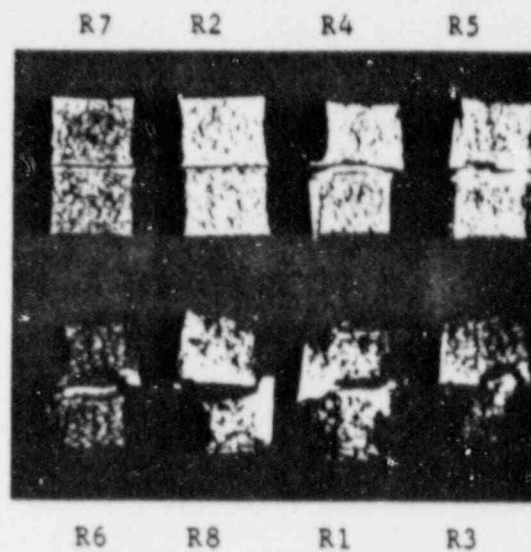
CHARPY IMPACT SPECIMEN FRACTURE SURFACES FOR
